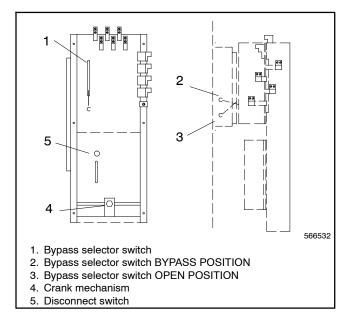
Bypass Switch Crank Mechanism Location, 600–1200 Amp Switches
